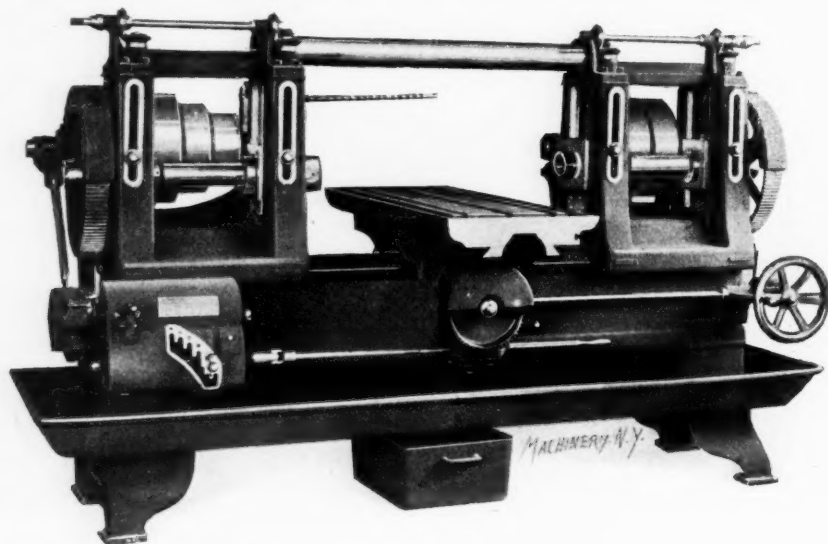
Double-head Lincoln Milling Machine built by the Hendey Machine Co.
